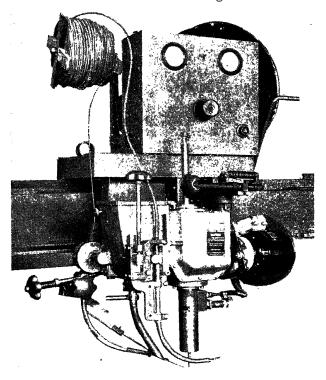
"Electronic tornado," automatic carbonarc welder fitted with carbon pencil, automatic attachments for feeding filler metal, and autogenizing material that provides a shielded arc. (Lincoln Electric.)
